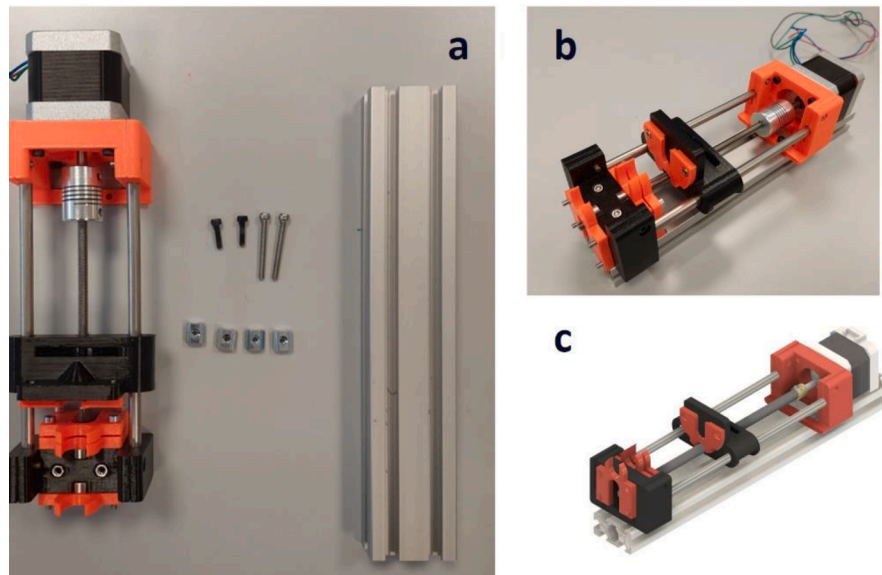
Assembly of the syringe pump to the aluminum rail support: (a) Exploded view of the essential parts. (b) Attached syringe pump on the aluminum rail support using post assembly nuts. (c) Rendering image of the syringe pump.
